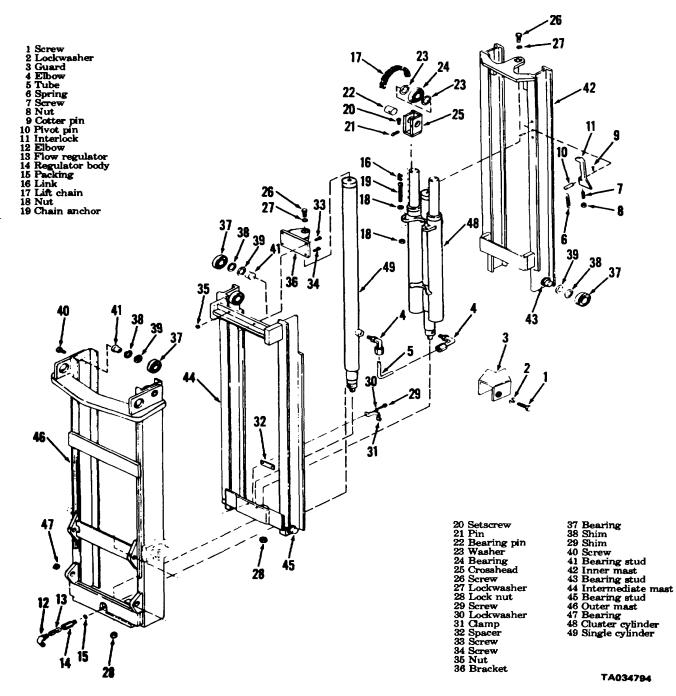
Mast assembly (model ACC40-24PS180), exploded view.
